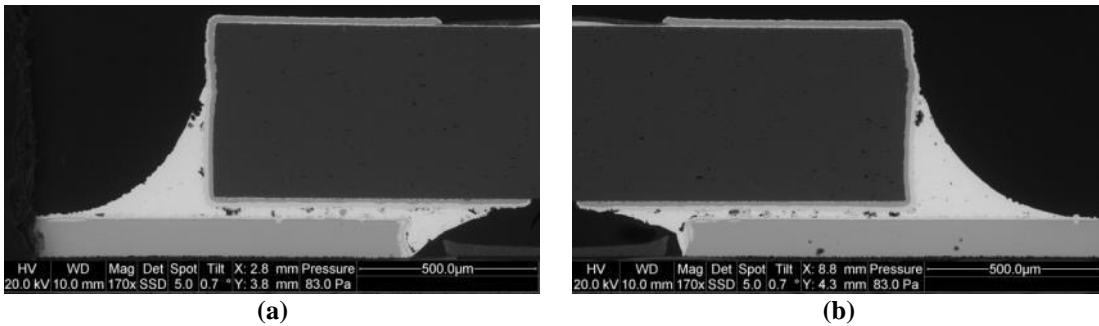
R2512 – SAC305+0.05%Mn (a) Left Solder Joint (b) Right Solder Joint after 1000 hours/200°C Aging
